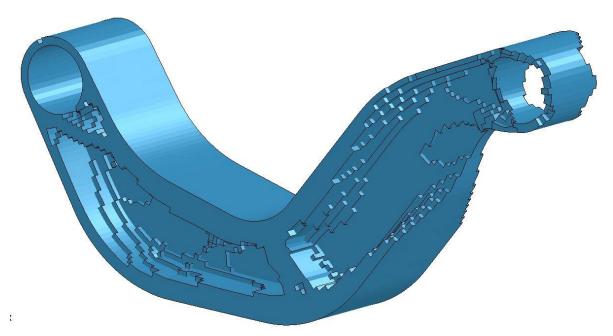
Design with forging geometry definition. Note the web that is required for forging.
